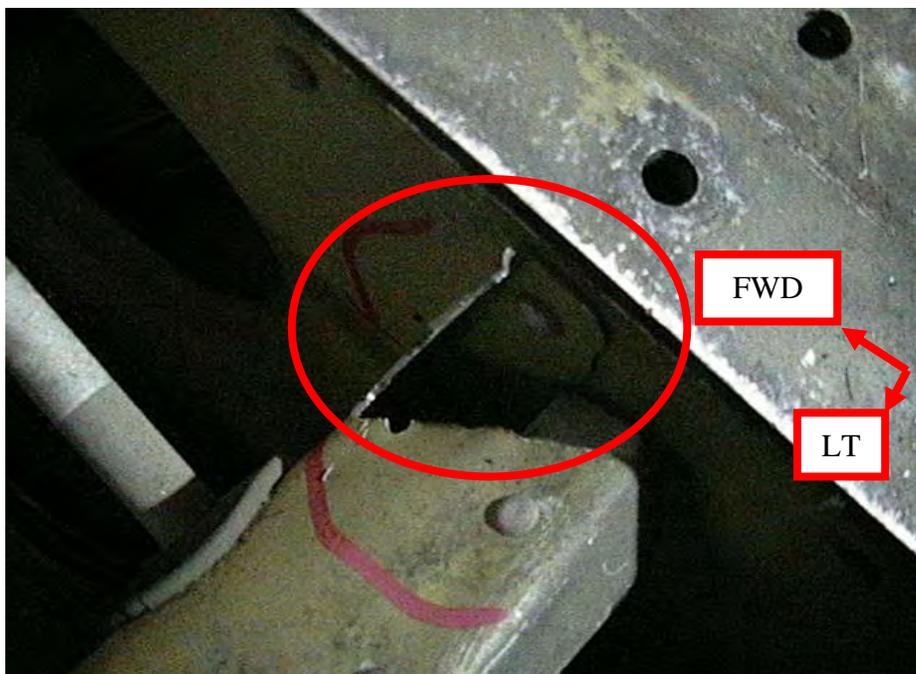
Torn Lower Center Bulkhead Assembly FS 162.6, WL 16, RBL 6, and LBL 6
